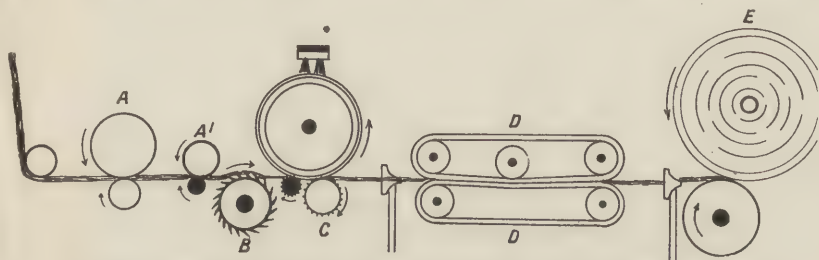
A.—Enlarged View of principal parts in a French Drawing-box.
